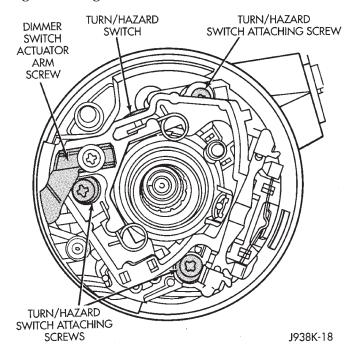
Turn/Hazard Switch And Dimmer Actuating
